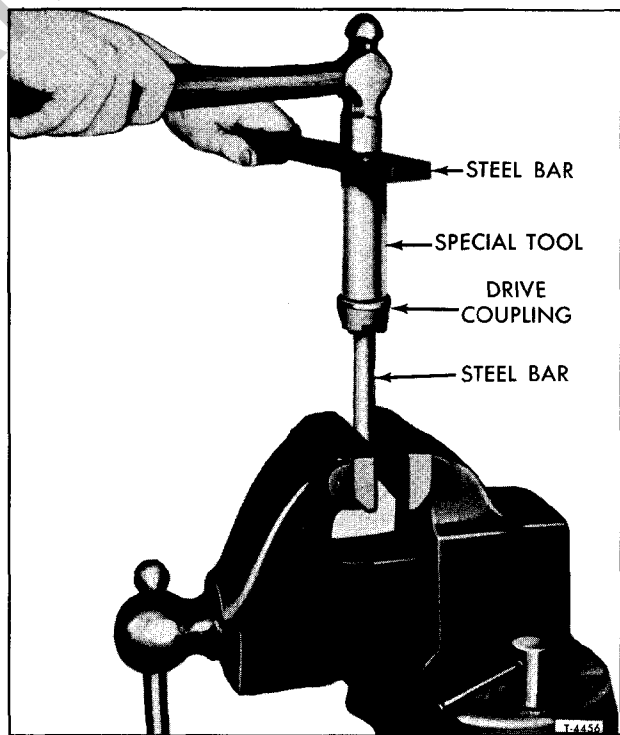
Removing Water Pump Drive Coupling from Shaft with Special Tool (J-1930)
